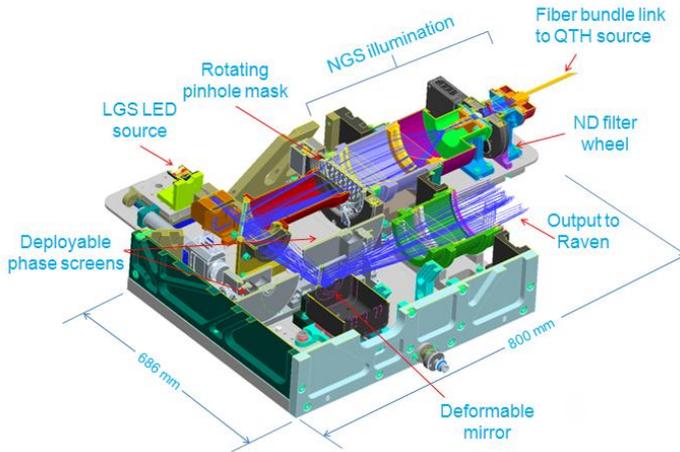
Raven calibration unit opto-mechanical assembly main components
